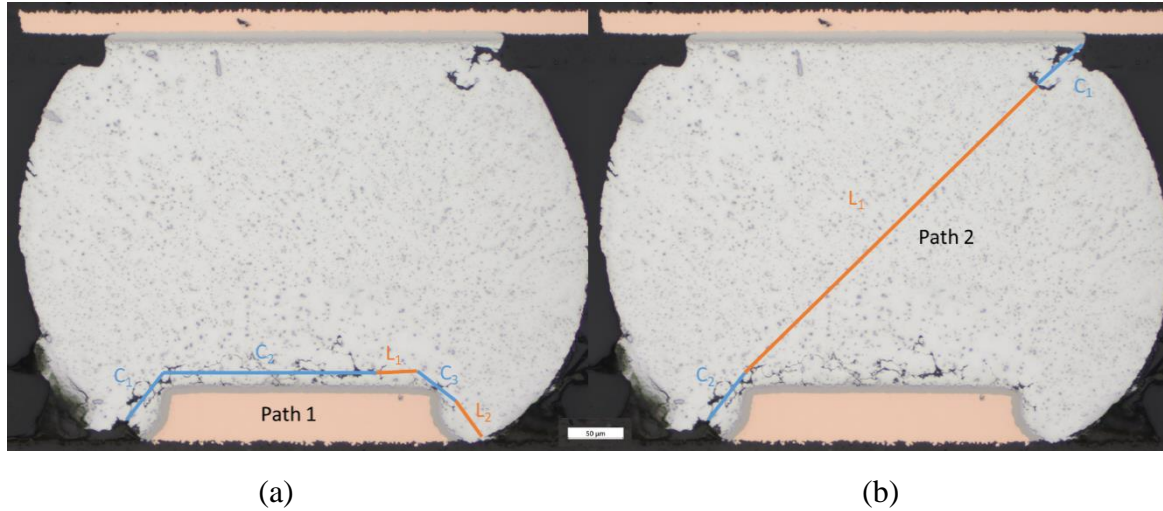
BGA solder joint with two crack paths (a) crack propagation near the PCB side (path1), (b) crack propagation along the diagonal (path 2)
